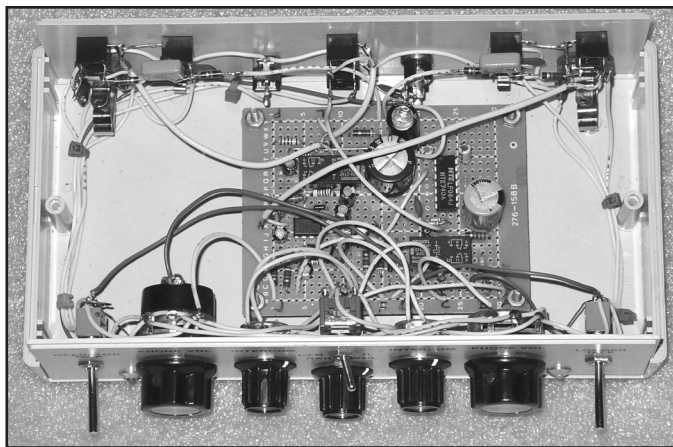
Inside view of the audio interface box. A RadioShack project board is used for most components.
